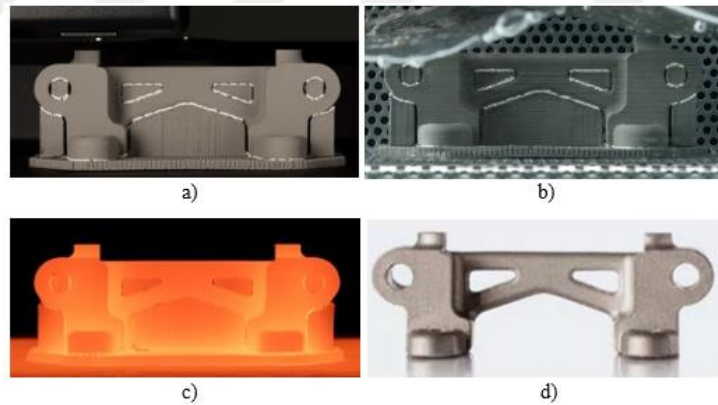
Steps of the extrusion based additive manufacturing; a) printed part (green part), b) debinding in a solvent, c) sintering and d) optional finishing processes (Website, 2020p)
